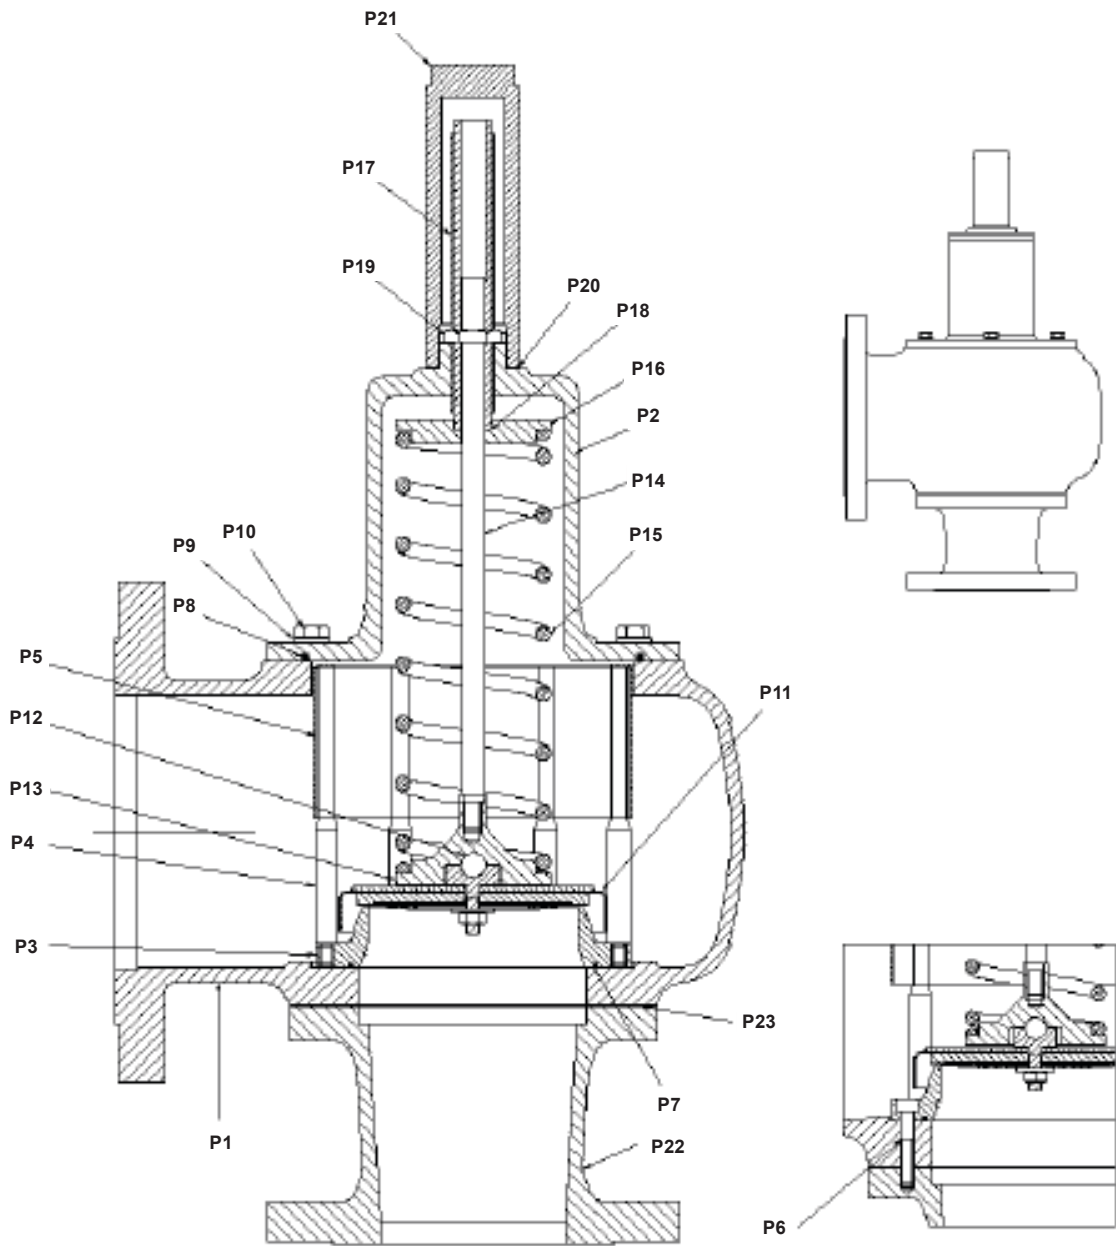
Type 4142HPF Pressure Relief Valve Assembly
